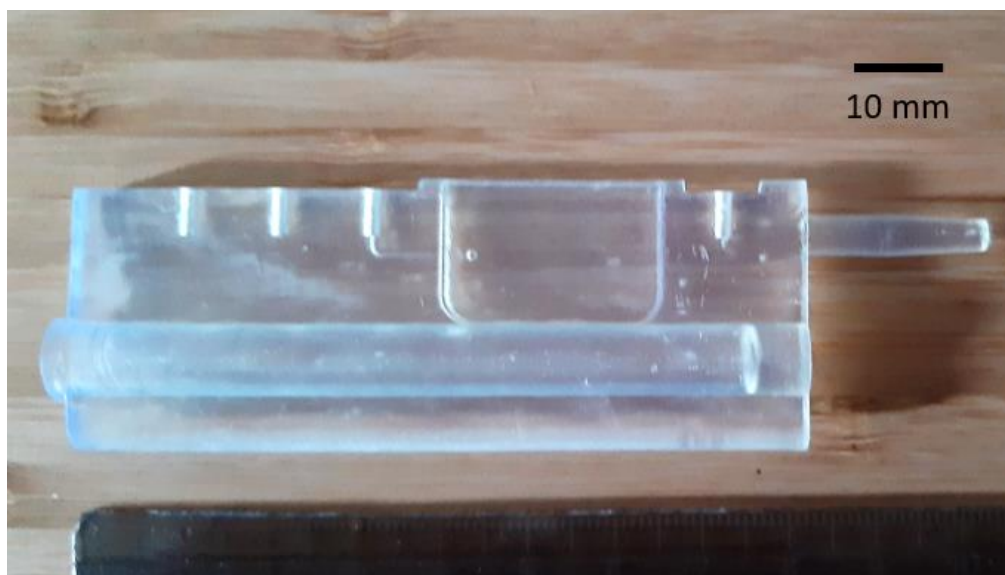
Design Idea 4: Cartridge fabricated using SLA printing
